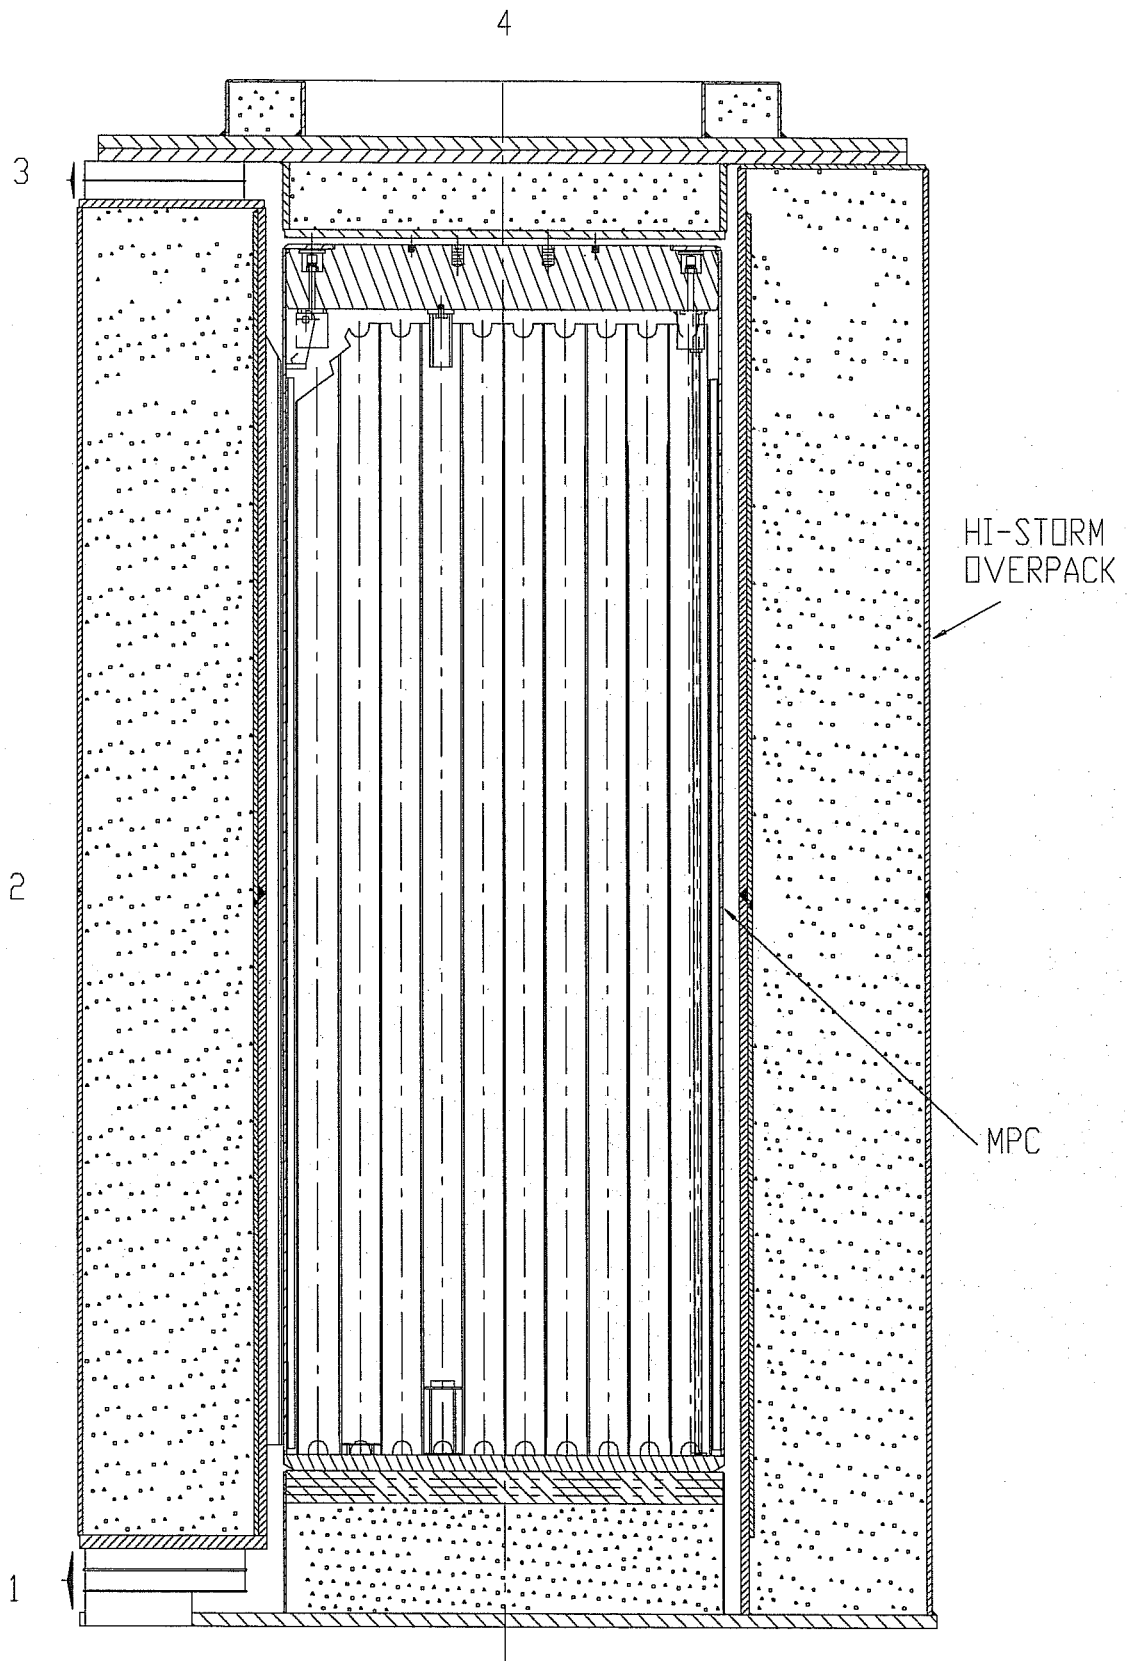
; CROSS SECTION ELEVATION VIEW OF HI-STORM 100 OVERPACK
